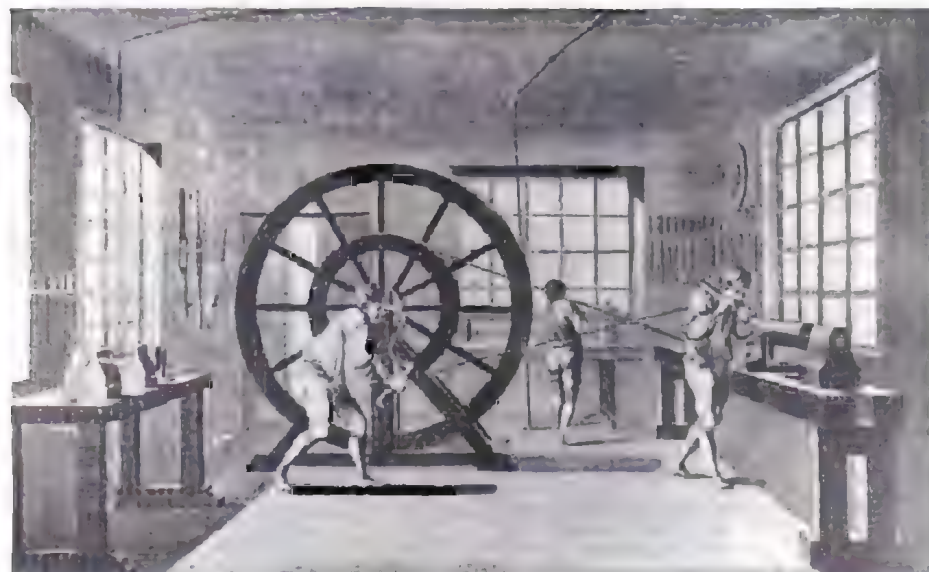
An example of a hand crank driven lathe, c.1771. (Diderot).
